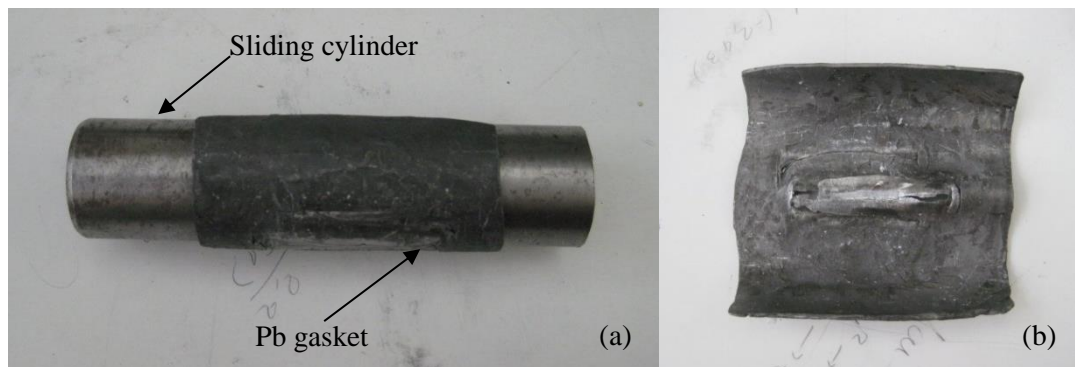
Sliding cylinder and Pb gasket: (a) Sliding cylinder with Pb gasket; (b) Pb gasket
